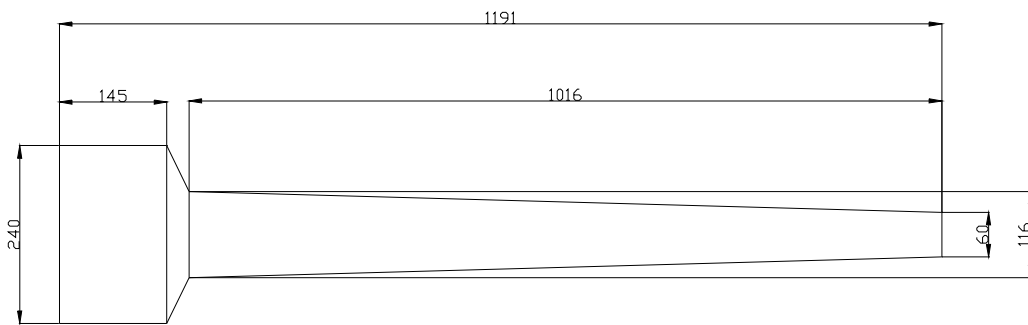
Preform dimension for two steps forging process (unit : mm)
